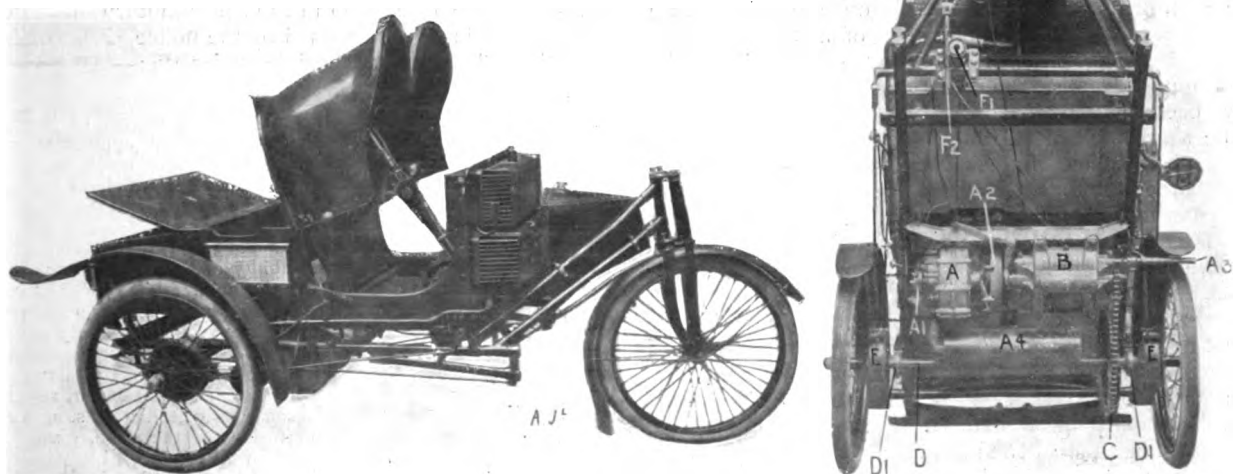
The "Avon" Three-Wheeled Car.—View showing the manner in which the seats hinge up to give access to the machinery.
